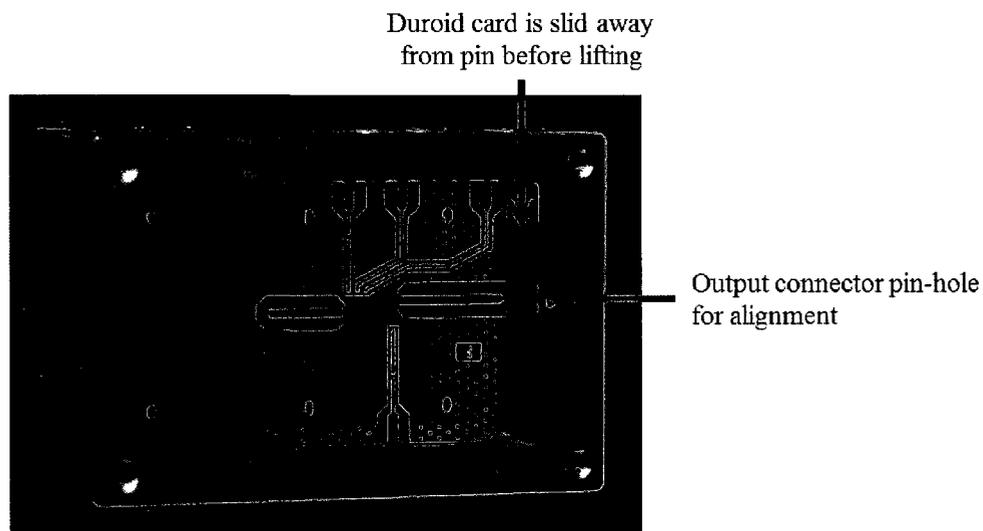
A picture showing the slid Duroid card and the output connector pin-hole
